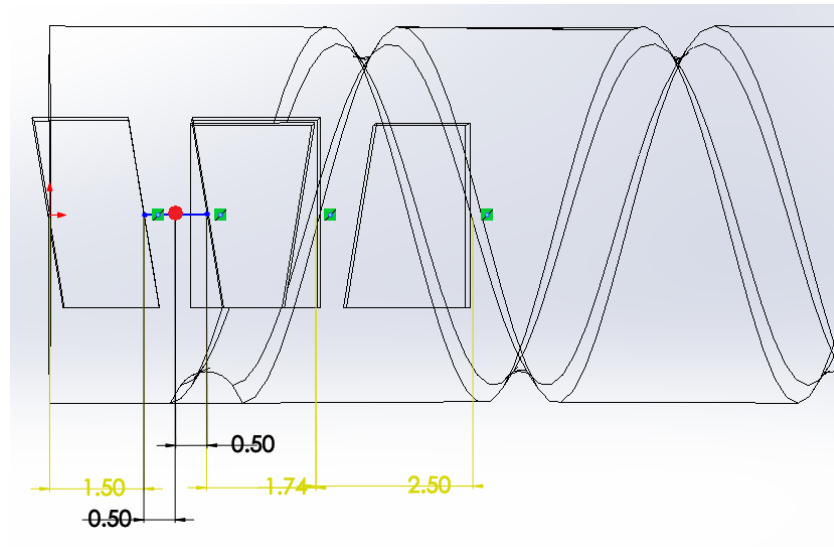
Design dimensions of the mechanical element that catches the wire coil
